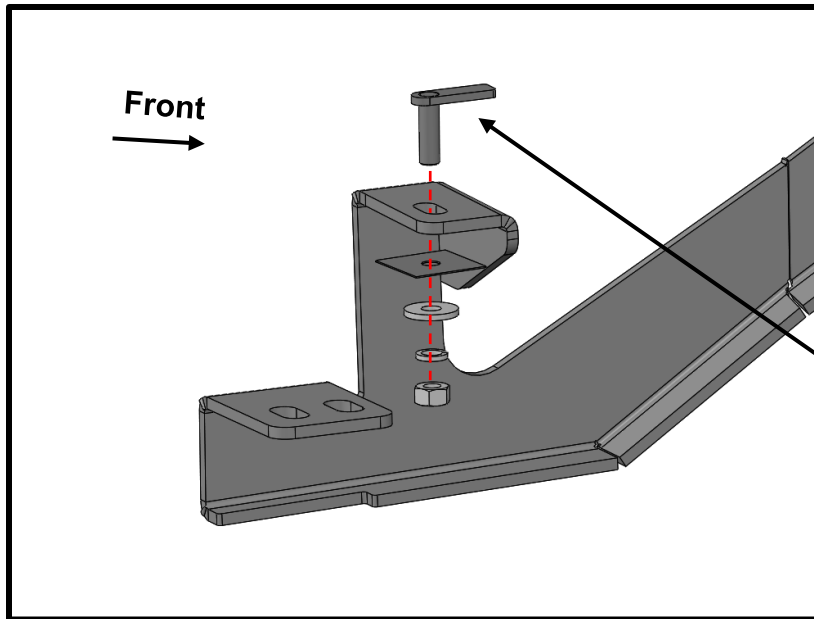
Use fish wire to guide the bolt plate into its mount hole
